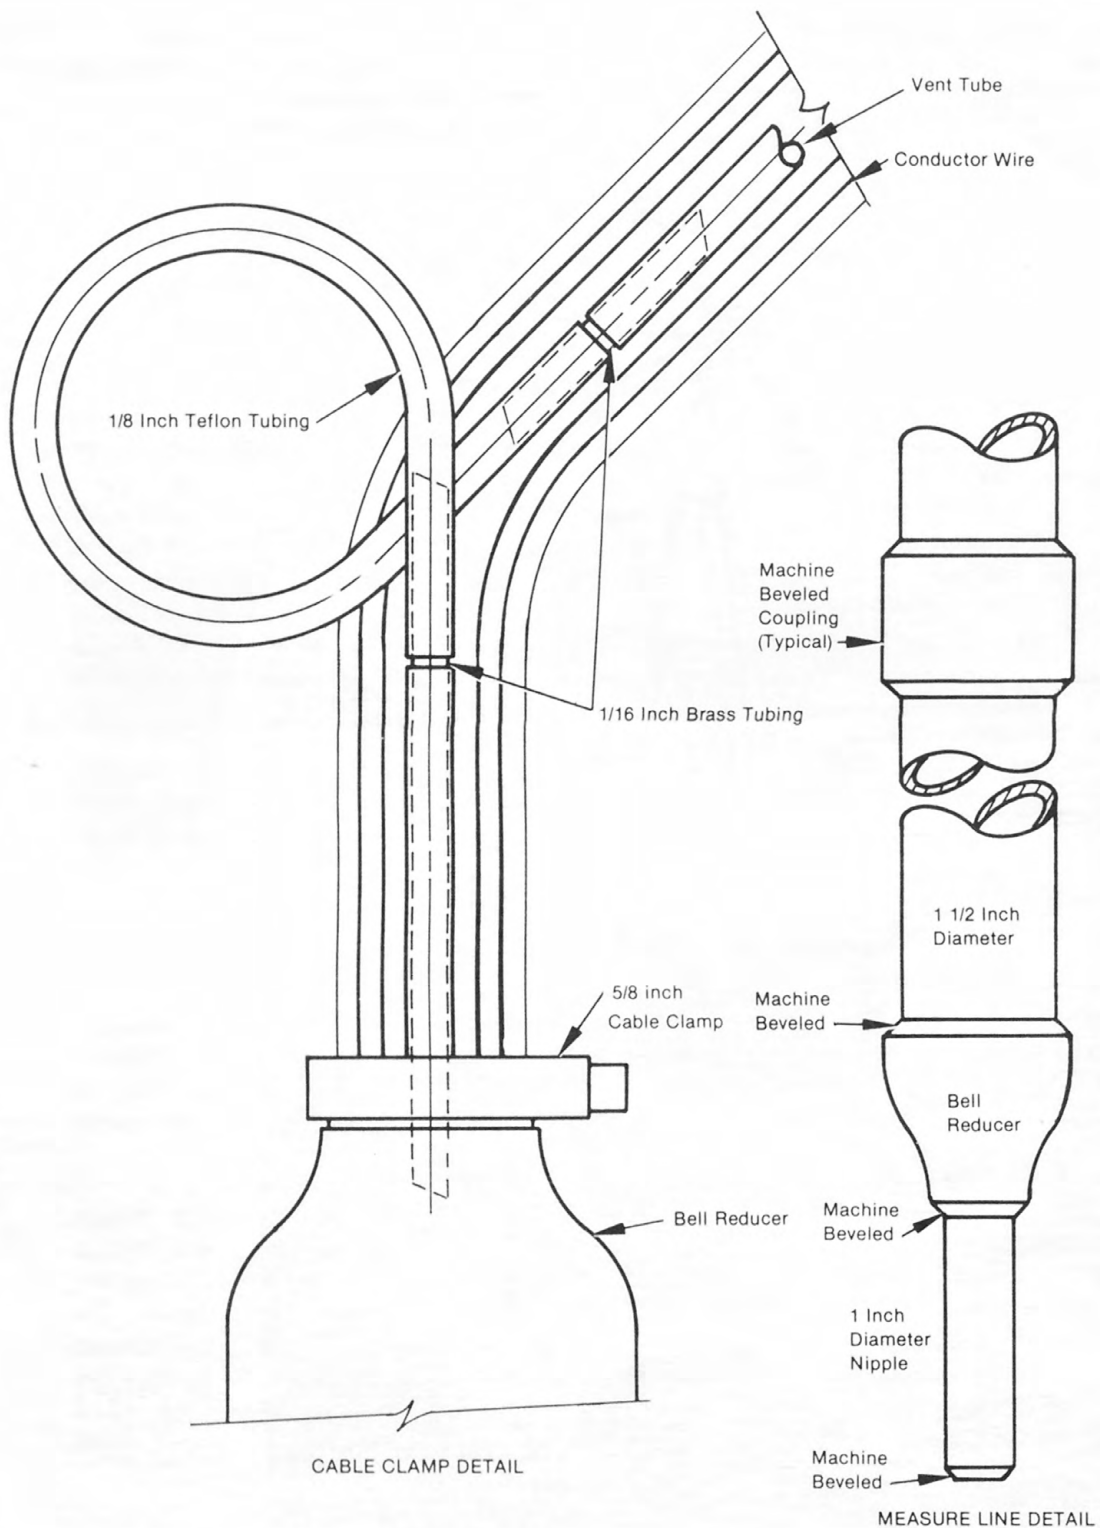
Construction illustration of transducer measuring line and surface cable clamp detail.
